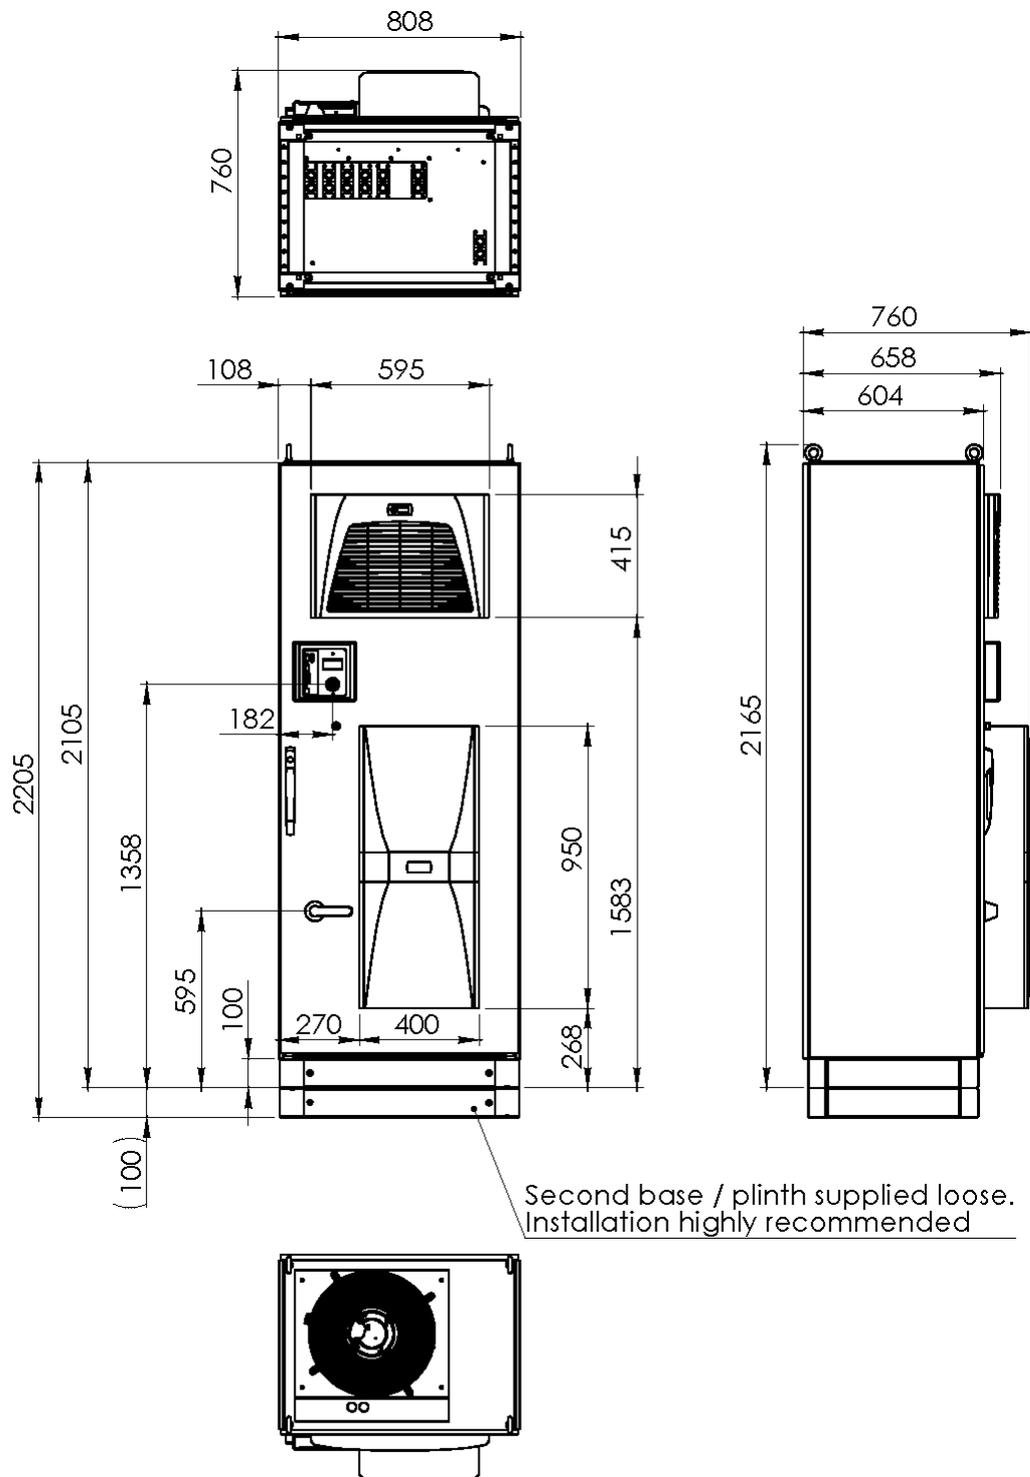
Dimensional drawings ECOsine® active-200/250/300-480-3 (with mounted base 100 mm)\
